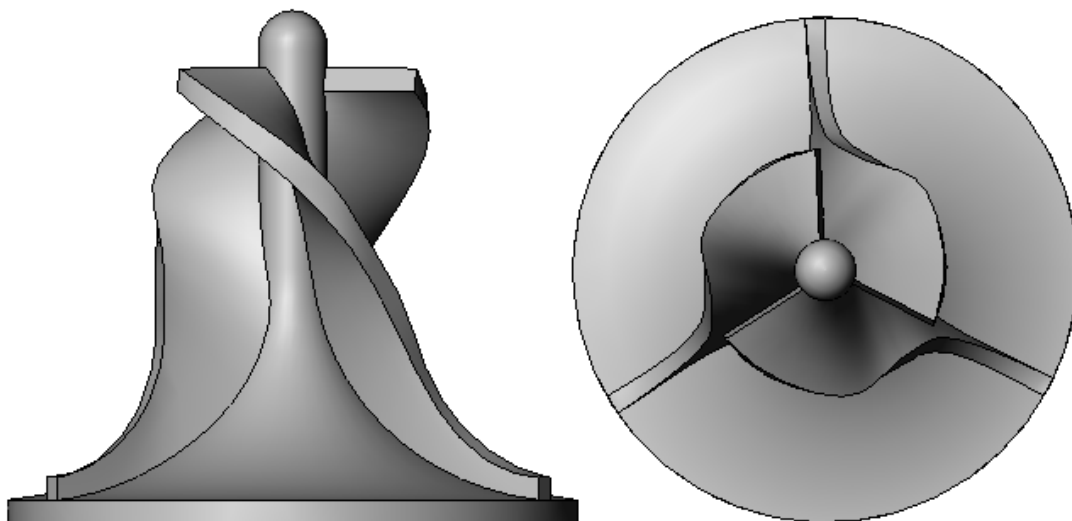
Side elevation, left, and plan view of a mixed flow impeller.
